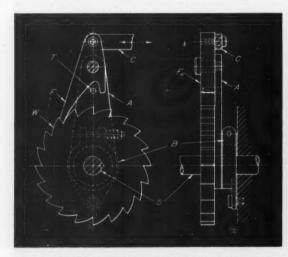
Silent-operating, positive-drive mechanism with the ratchet pawl pivoted on the oscillating driving arm
